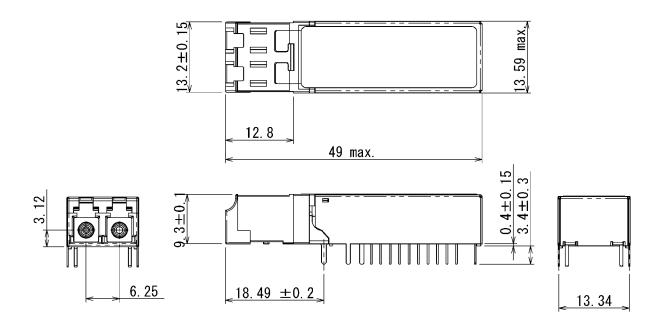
Outline Dimensions (SCM6318-GL-ZN)
